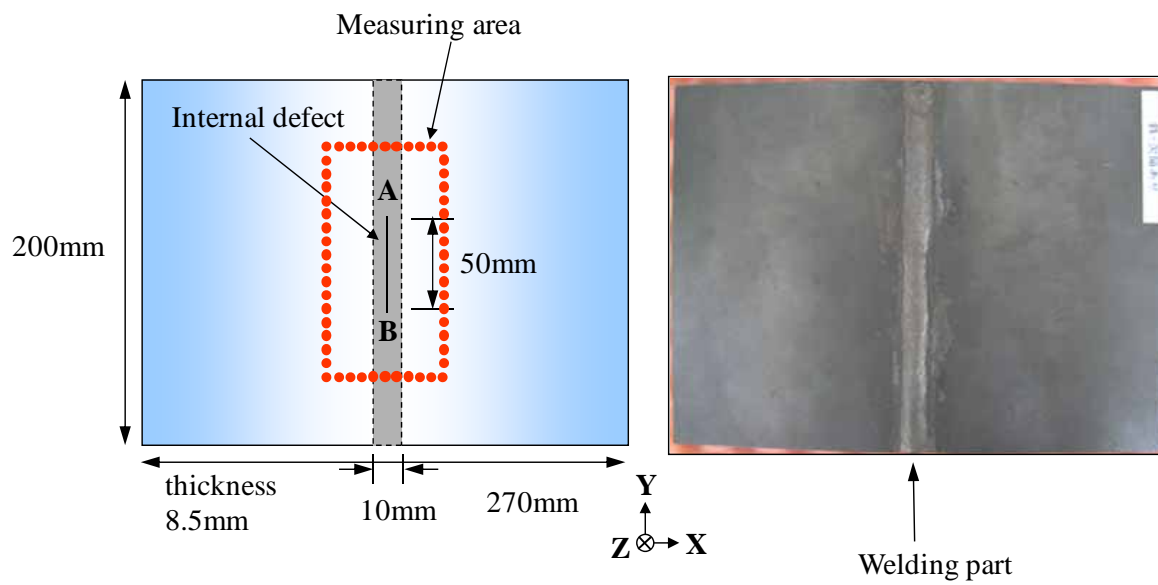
Iron plate with a slit like artificial defect of 50 mm in length inside the welding parts
